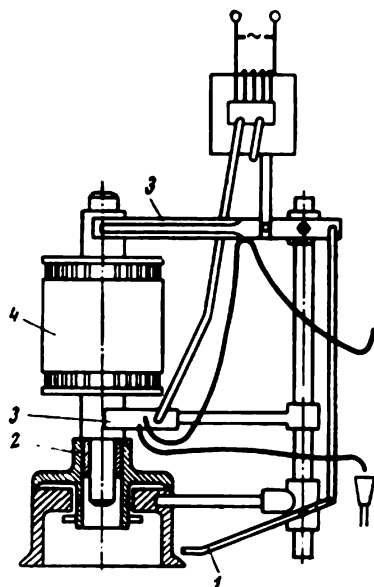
Appliance for soldering rotor rings and stator windings, mounted between the electrodes of a spot-welding unit:
